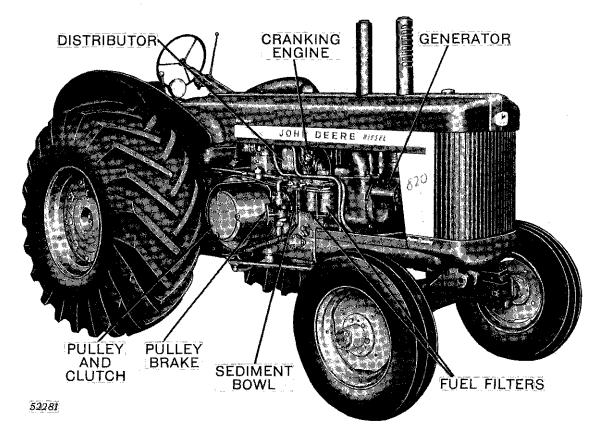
John Deere "820" Series Diesel Tractor-Pulley Side
